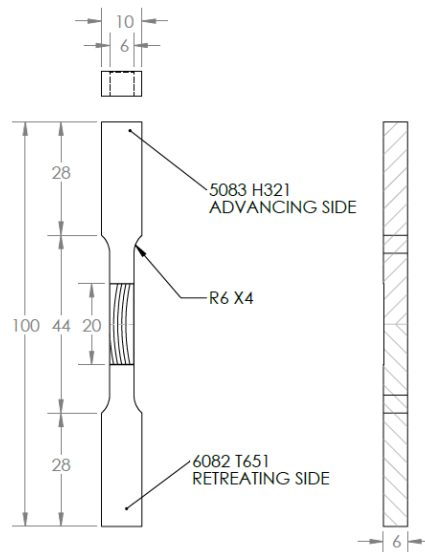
CAD drawings for tensile test specimens (dimensions are in mm)
